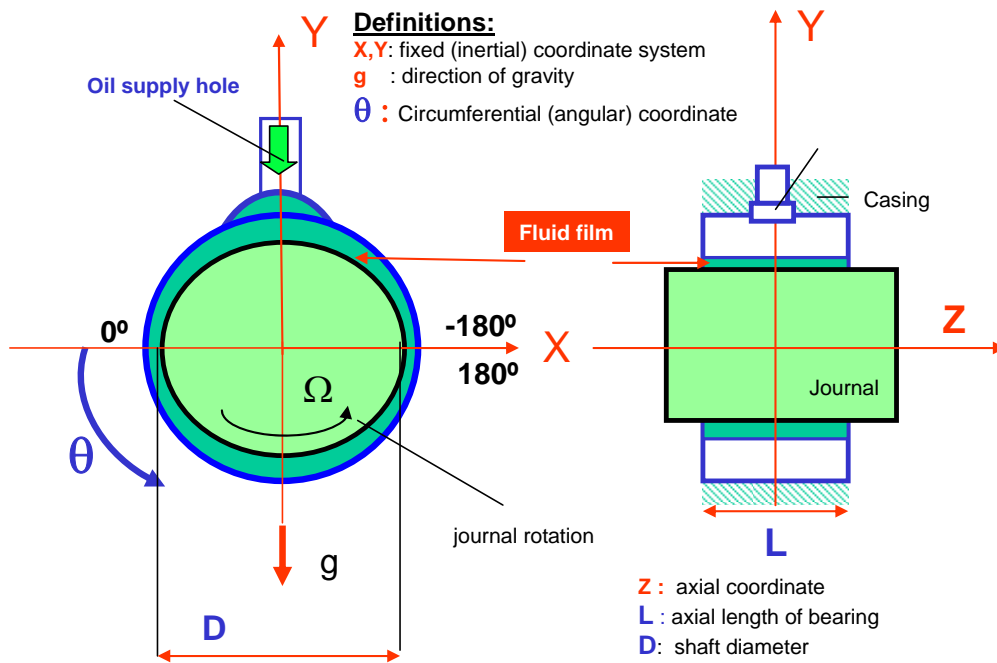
Geometry of a cylindrical bearing pad with feed hole (not to scale)
